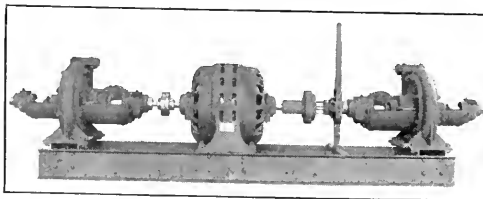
SHIFTER ON CLUTCH BETWEEN PUMP AND MOTOR
